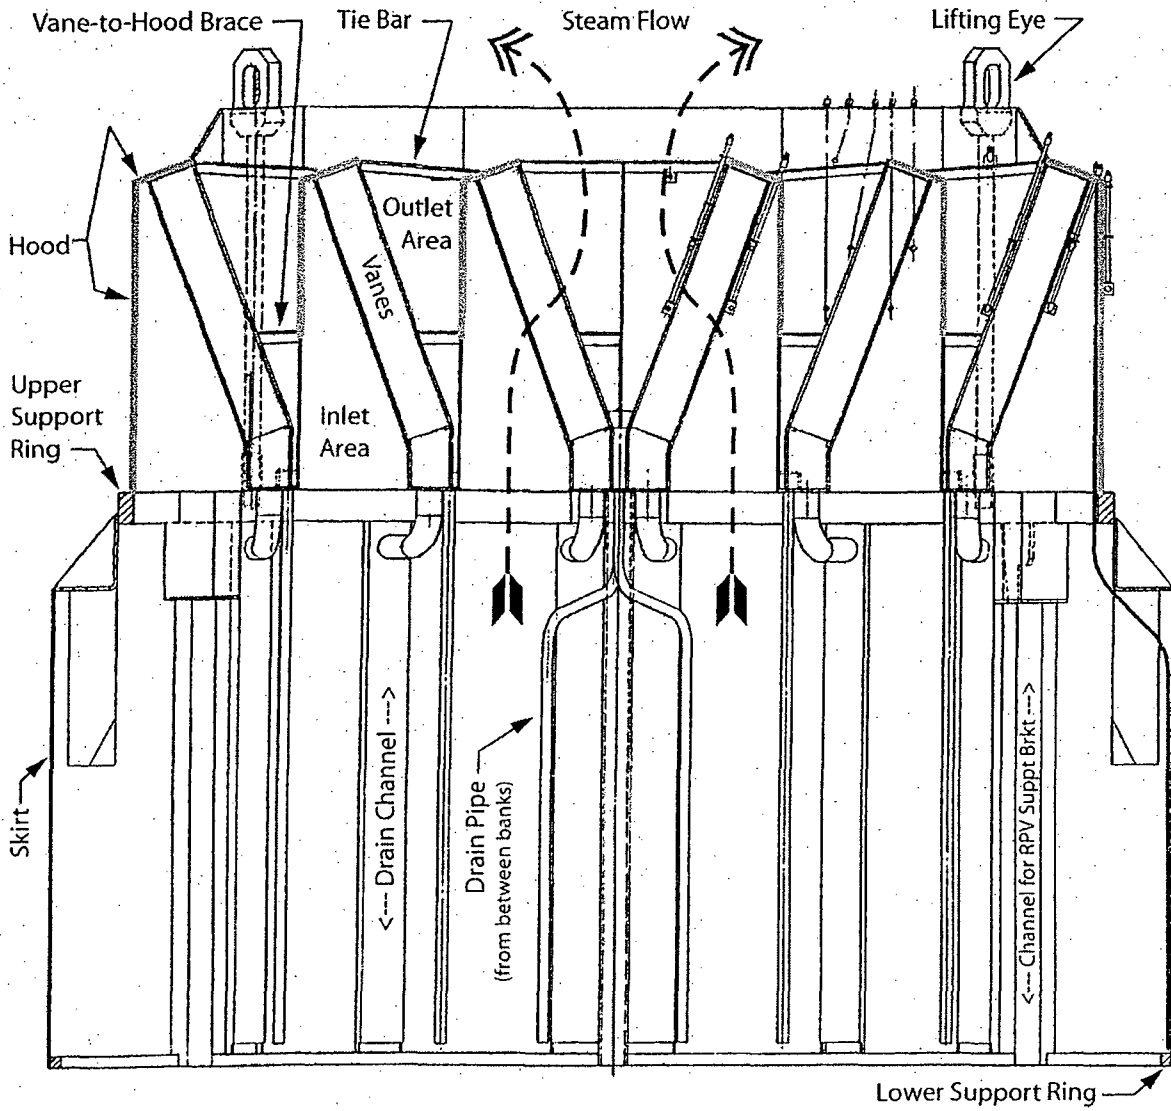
Cross-Section of BWR/2 Steam Dryer
